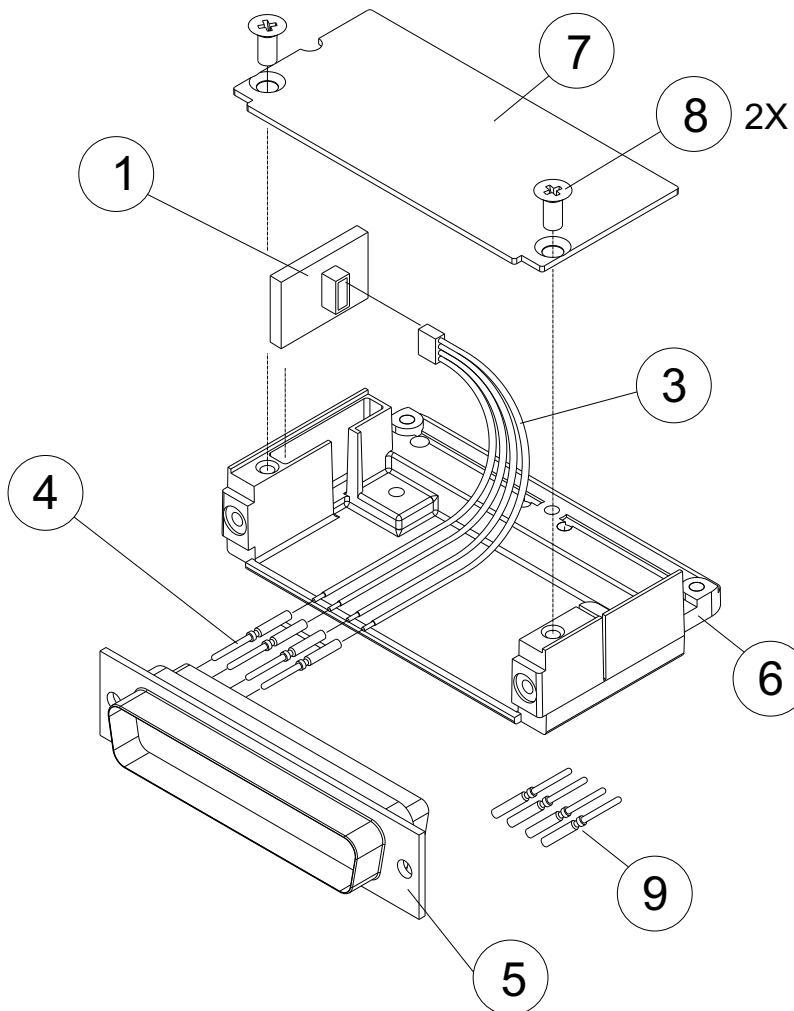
Backshell Assembly (Potted Configuration Module)
